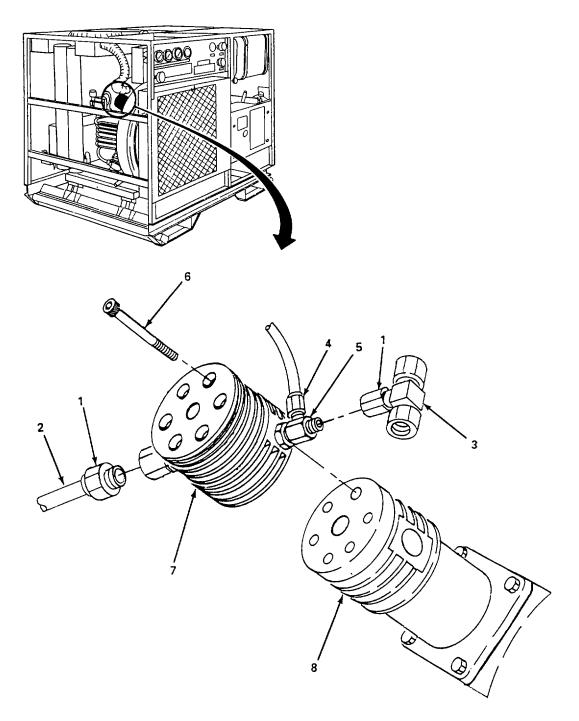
4th Stage Valve Head Assembly, Replace.
